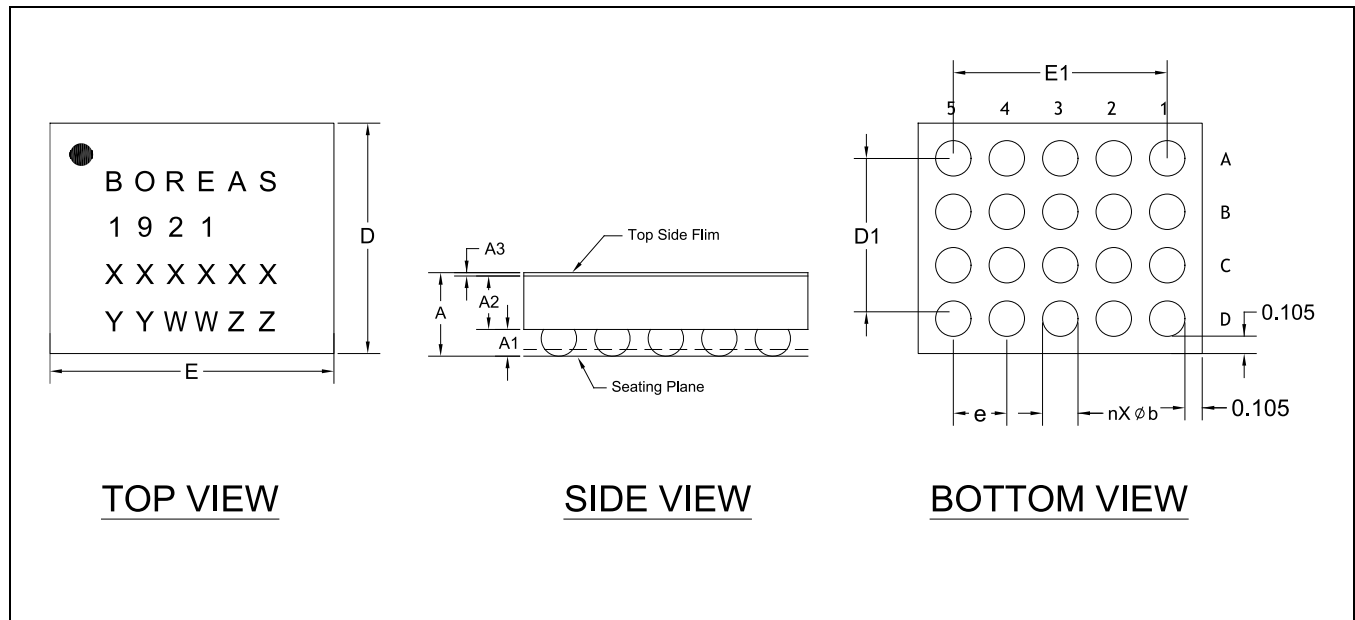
WLCSP 20B 2.1mm x 1.7mm package outline drawing with top, side, and bottom view
